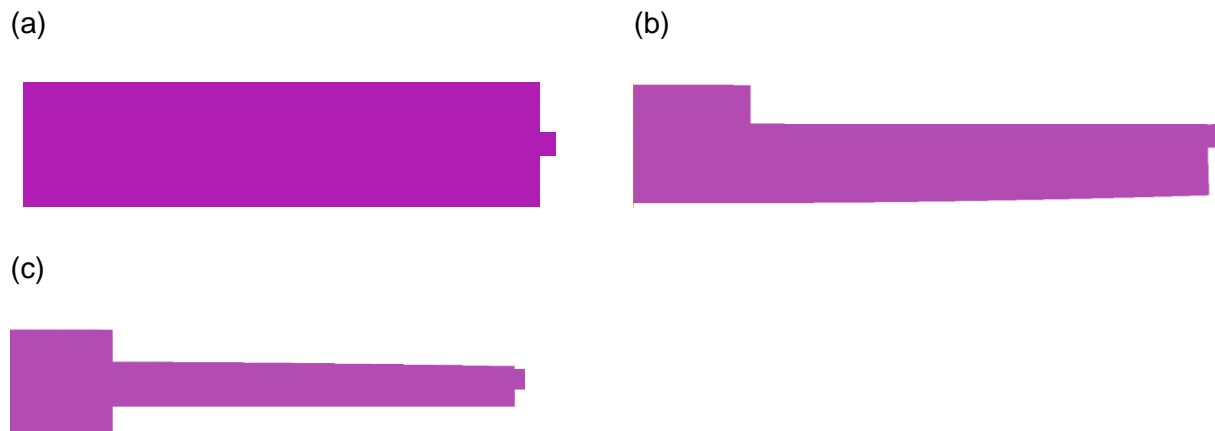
Different stages of material removal; (a) Initial stage, (b) Machined top face, (c) Machined bottom face.
